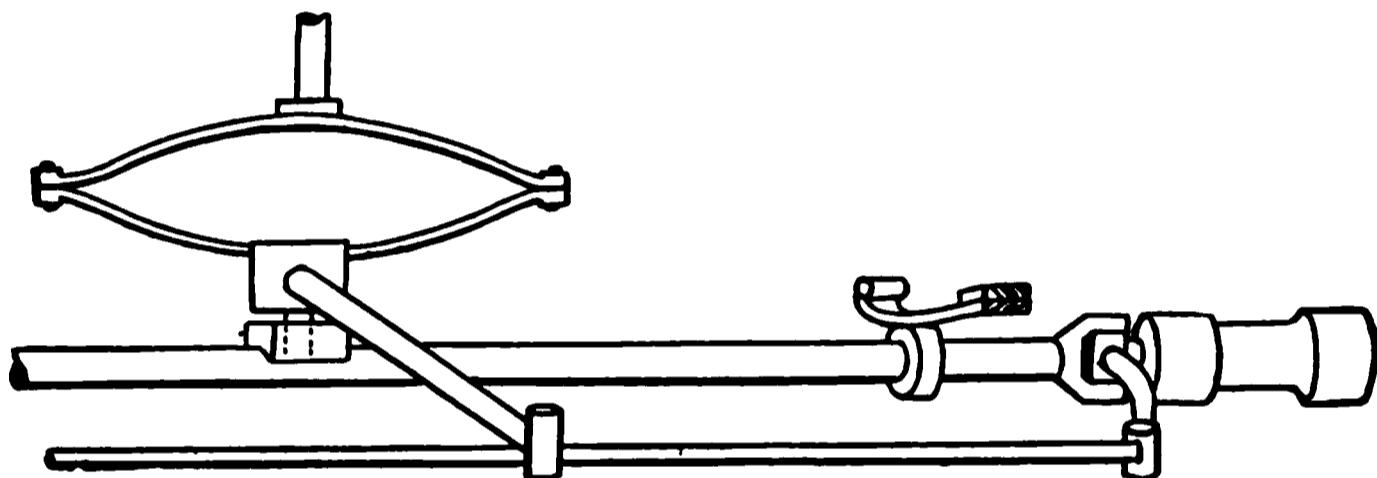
Spring Compensating Steering Device used on the Oldsmobile Carriage.
